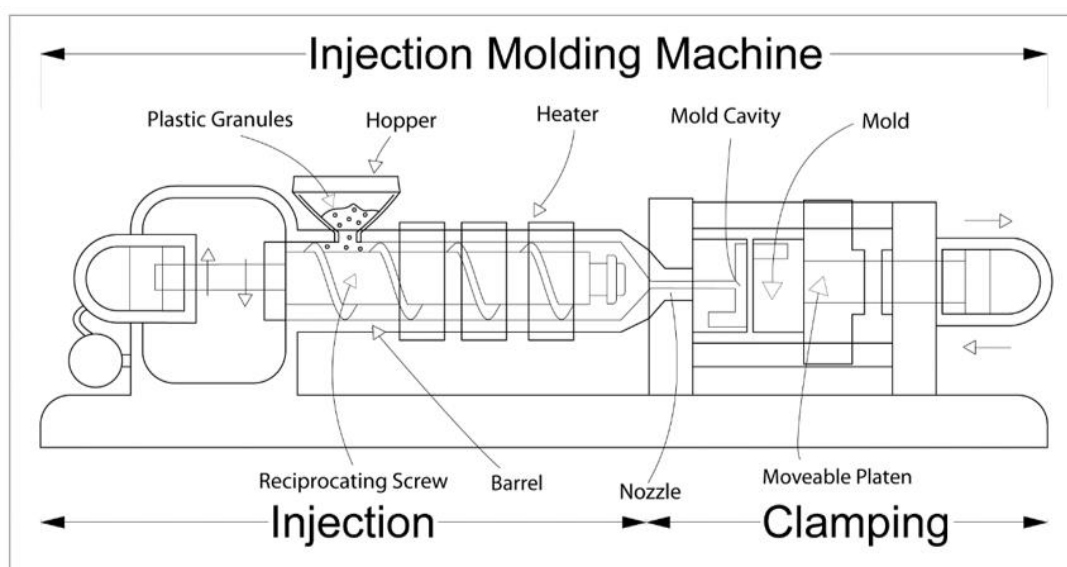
A schematic of the injection moulding machine, showing the hopper, heated barrel with reciprocating screw, mould cavity and mould.<sup>86</sup>
